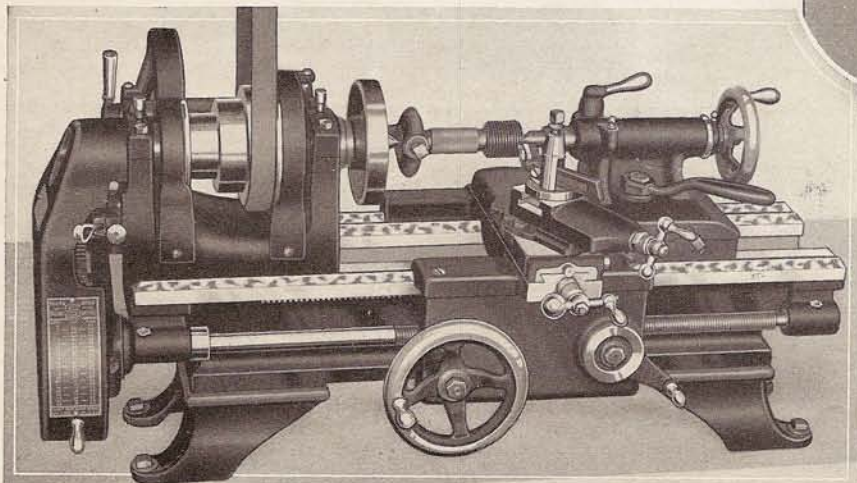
Cutting a United States Screw Thread on a Plug Type Master Thread Gauge in the No. 22-9-inch Junior Lathe
